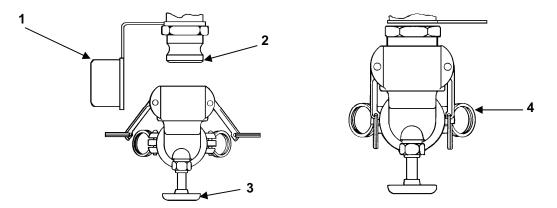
Coupler Valve Installed and Locked Onto Adapter Assembly.
